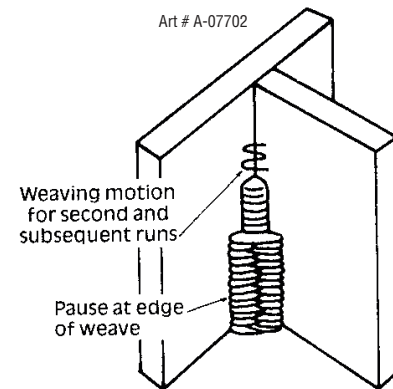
Multi Run Vertical Fillet Weld
